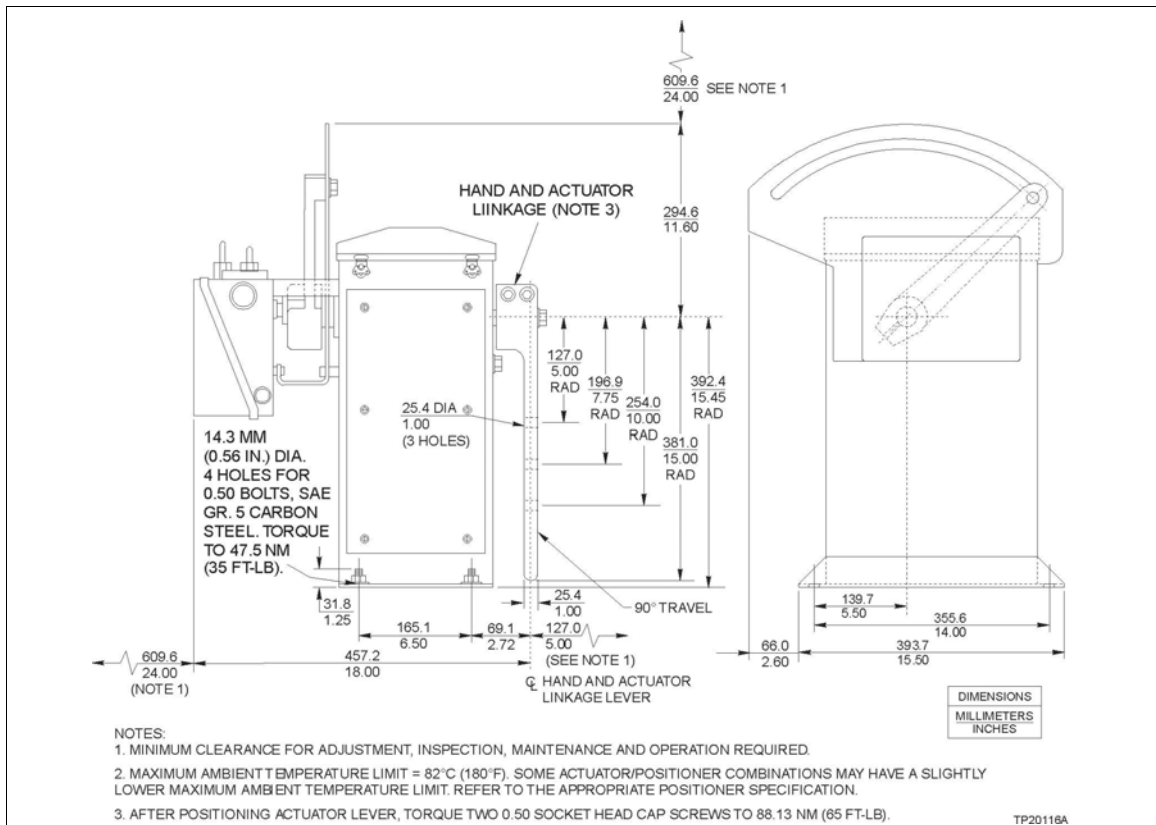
Type UP2 Actuator with Type AV Positioner or Solenoid Valve
